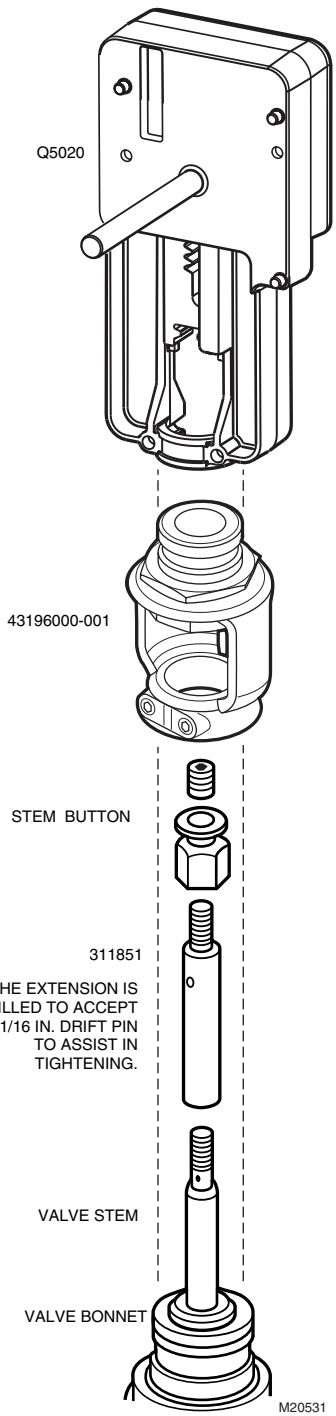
Installing bonnet adapter and stem extension to V5051.
